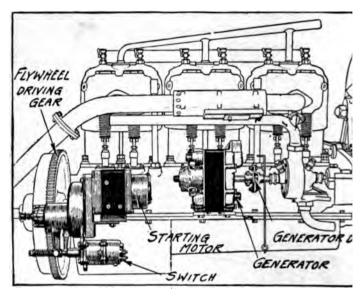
Method of Attaching Starting Motor and Generator of Three Unit System on Six Cylinder Engine.
